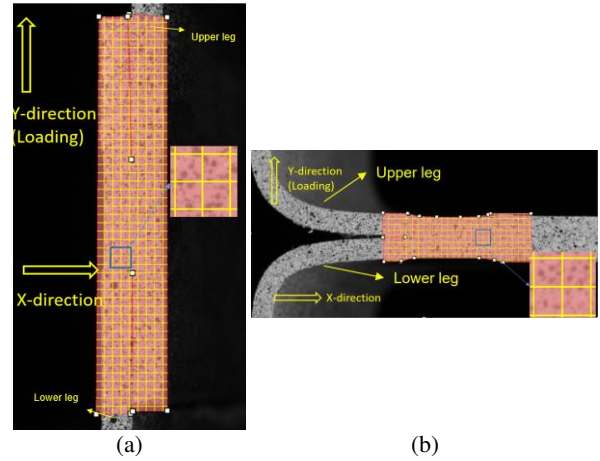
(a) Tensile shear and (b) Macro Coach peel samples after cutting the weld nuggets in half and preparation for DIC and together with the generated speckle patterns showing the size of the selected subsets together with the loading direction.
